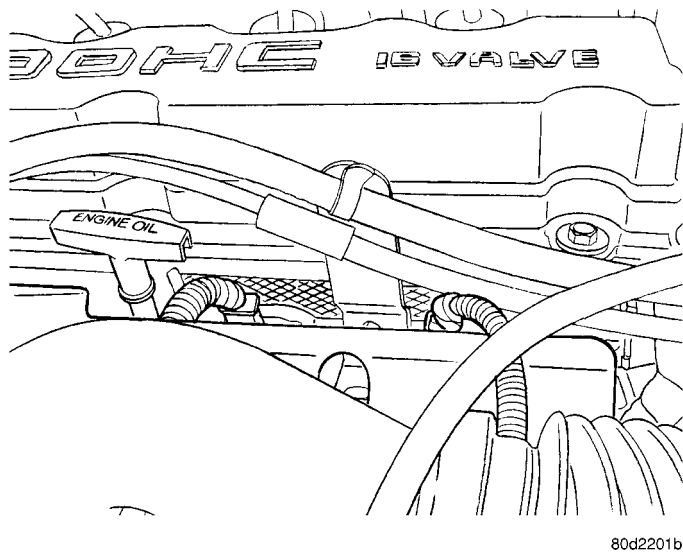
THROTTLE AND SPEED CONTROL CABLE
